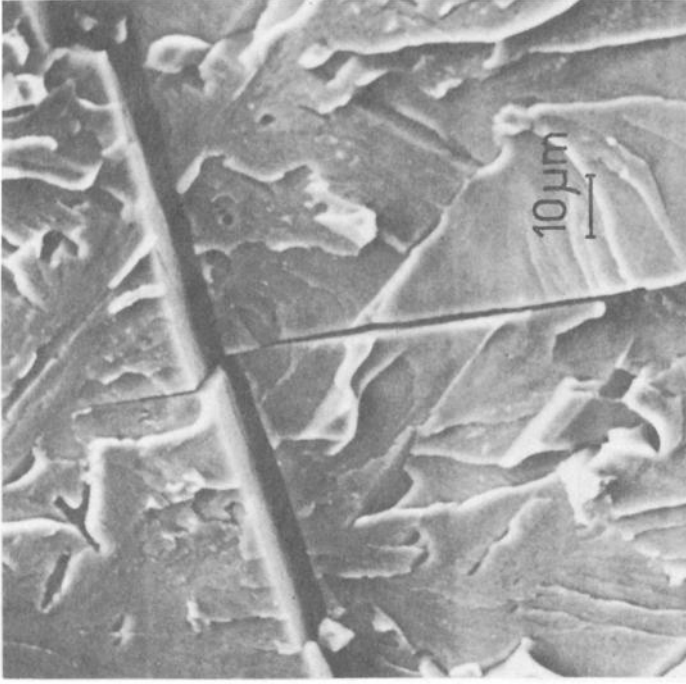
Typical area on a fracture surface showing cleavage facets.
